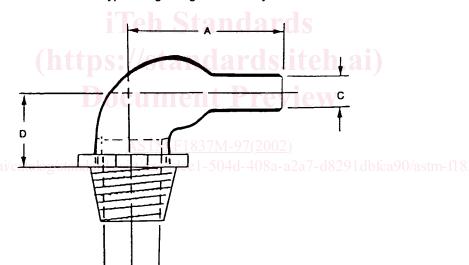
Type IV-Right-Angle Cable Entry Seals
